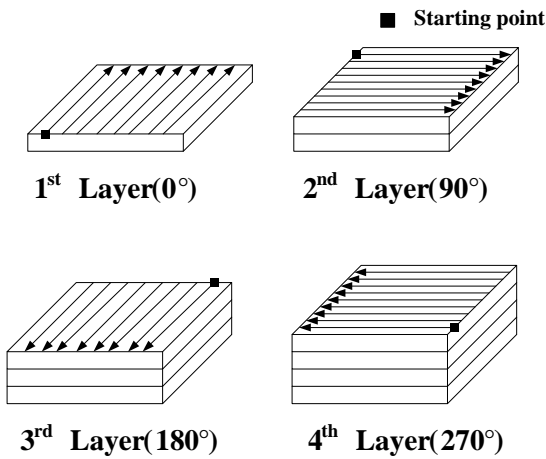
Fabrication of quadrangle structure by cross-hatching technique
